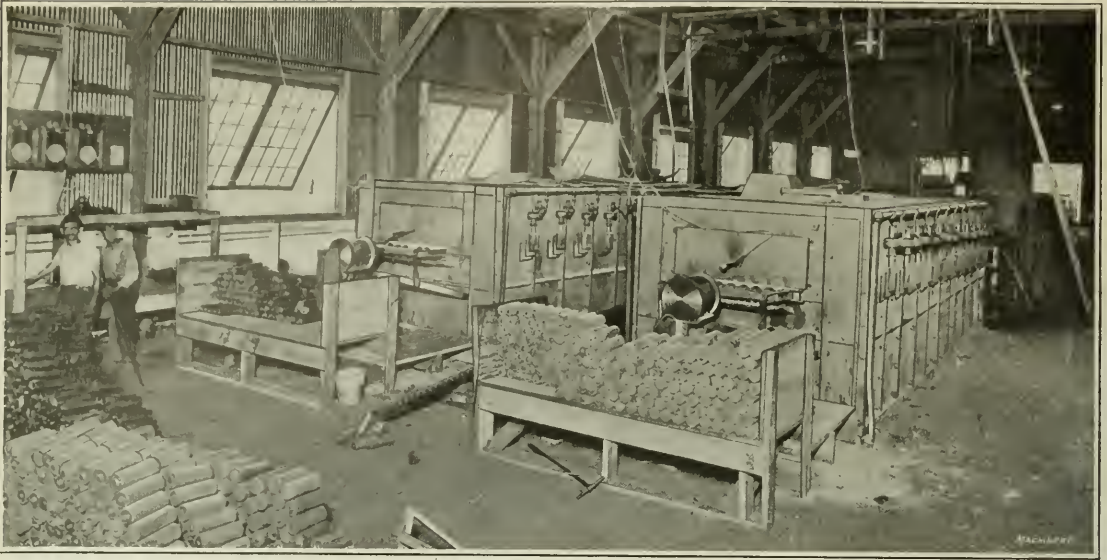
Charging End of Hardening Furnaces with Pushers in Place. One Tempering Furnace can be seen at Extreme Right, with Oil Quenching Tank at Front. Control Pulpit is shown at Left of Hardening Furnaces
